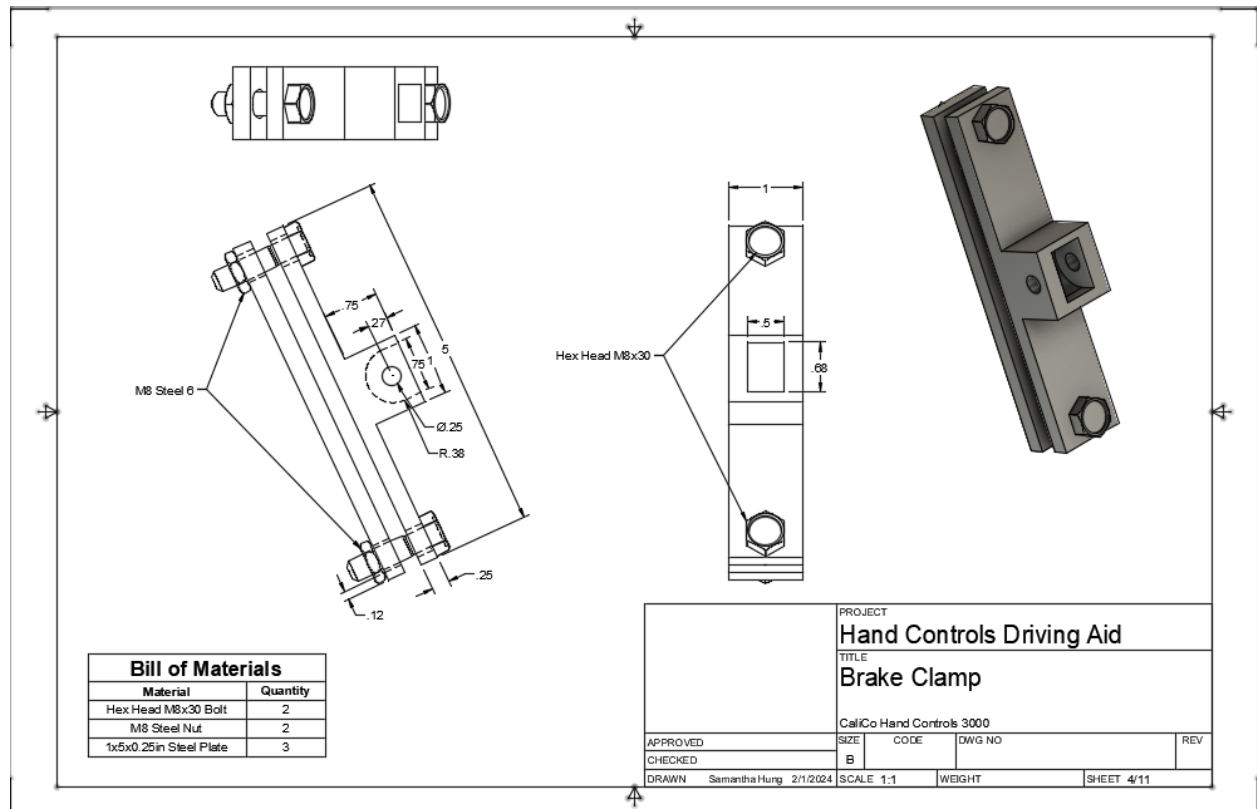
Detailed drawing and isometric view of the brake clamp component
